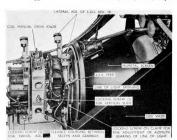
Follower unit Type 4: assembly of coil rotating mechanism
